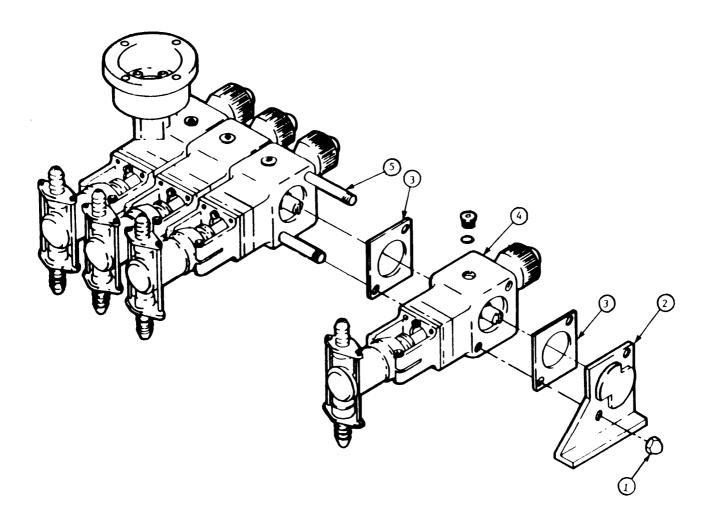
Chemical Feed Pump Block/Head Assembly (ARMY)
